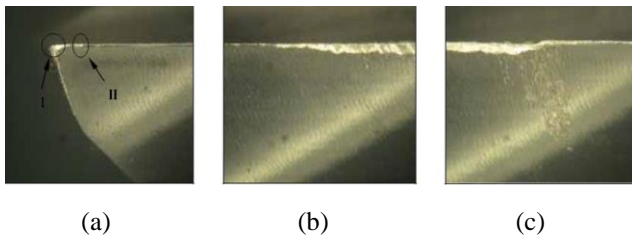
The first cutting experiment of multi-layer AlCrN composite coating tool edge wear morphology (a-Edge wear parts; b-II wear parts left amplification; c-II wear parts right amplification).
